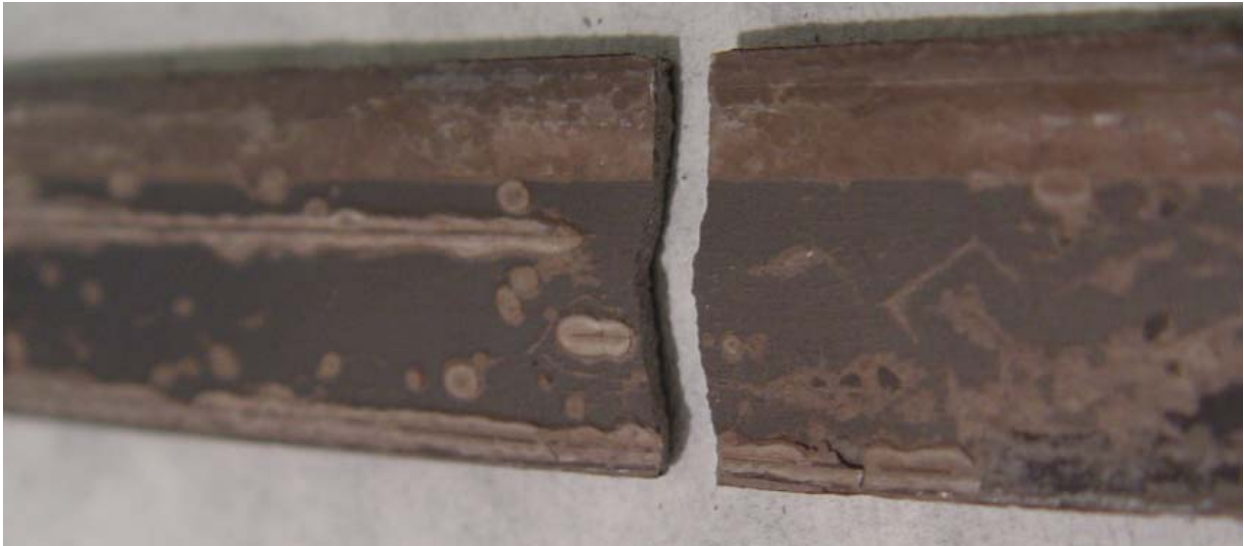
View of the broken shroud plate CODEX-CT preliminary test
